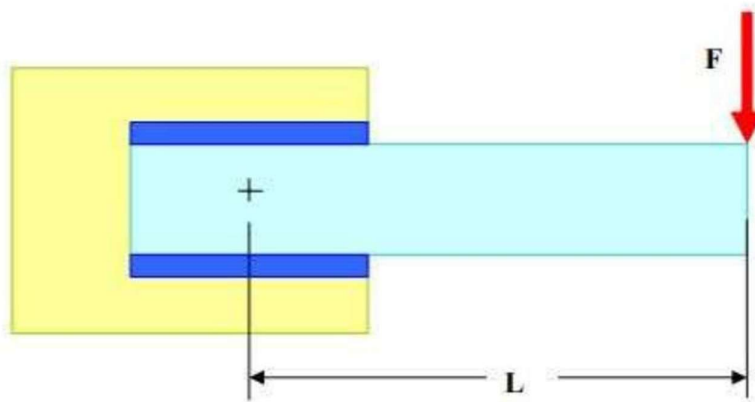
Eccentrically loaded parallel fillet joint
